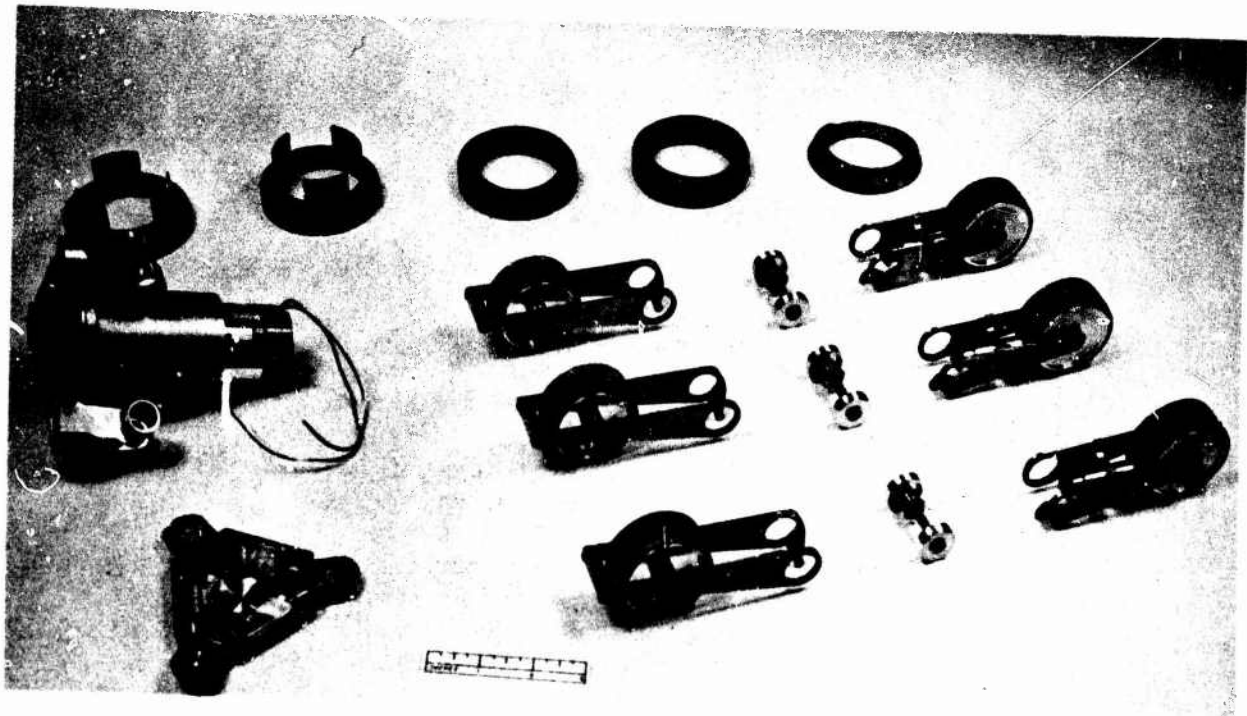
EXPLODED VIEW OF MODEL VI TRAVERSE ASSEMBLY COMPONENTS
